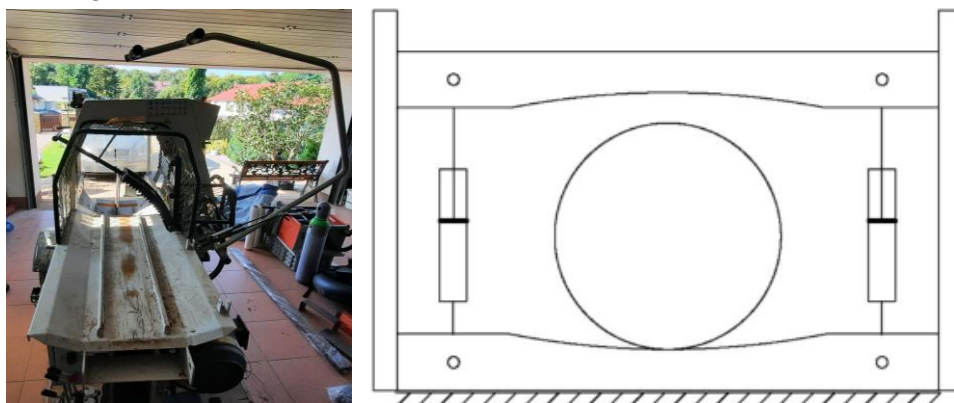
Original lever- type log holder concept of the commercially produced Lumag SSA 500E mobile working machine (on the left) and schematic representation of Variant A of the clamping design (on the right)
